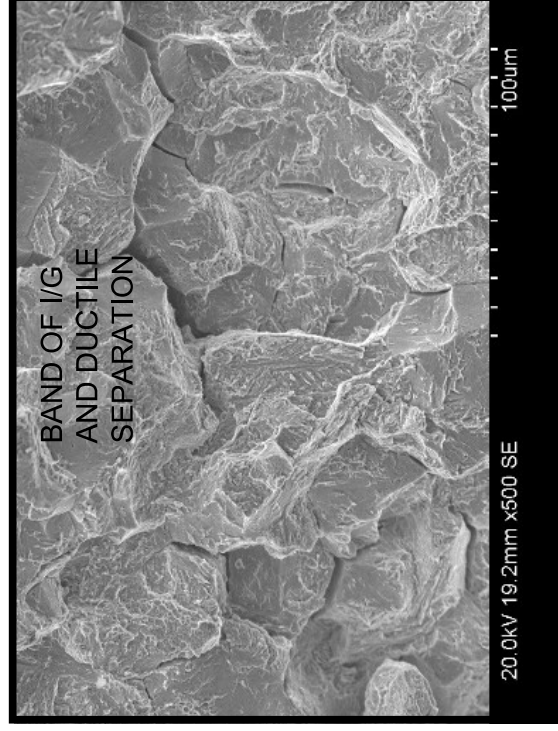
Closer View SEM image of Upper Drag Strut-Longitudinal Fracture A.
